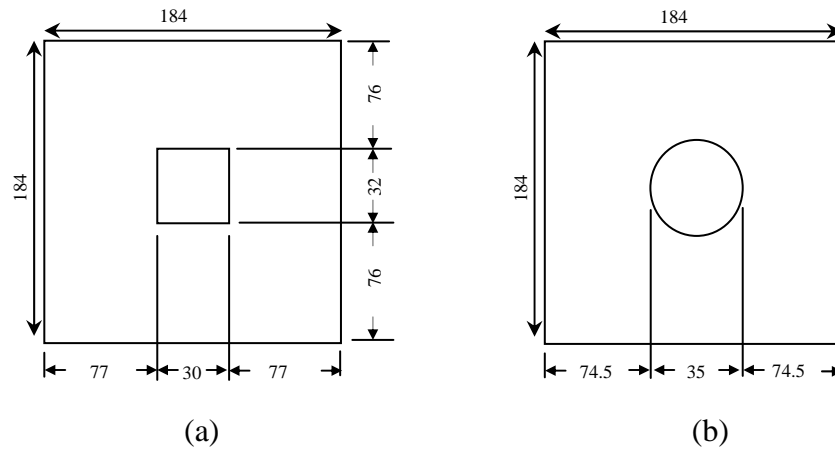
AutoCAD drawing of rectangular (a) and circular (b) dies including dimensions (drawn to scale, all dimensions are in mm)
